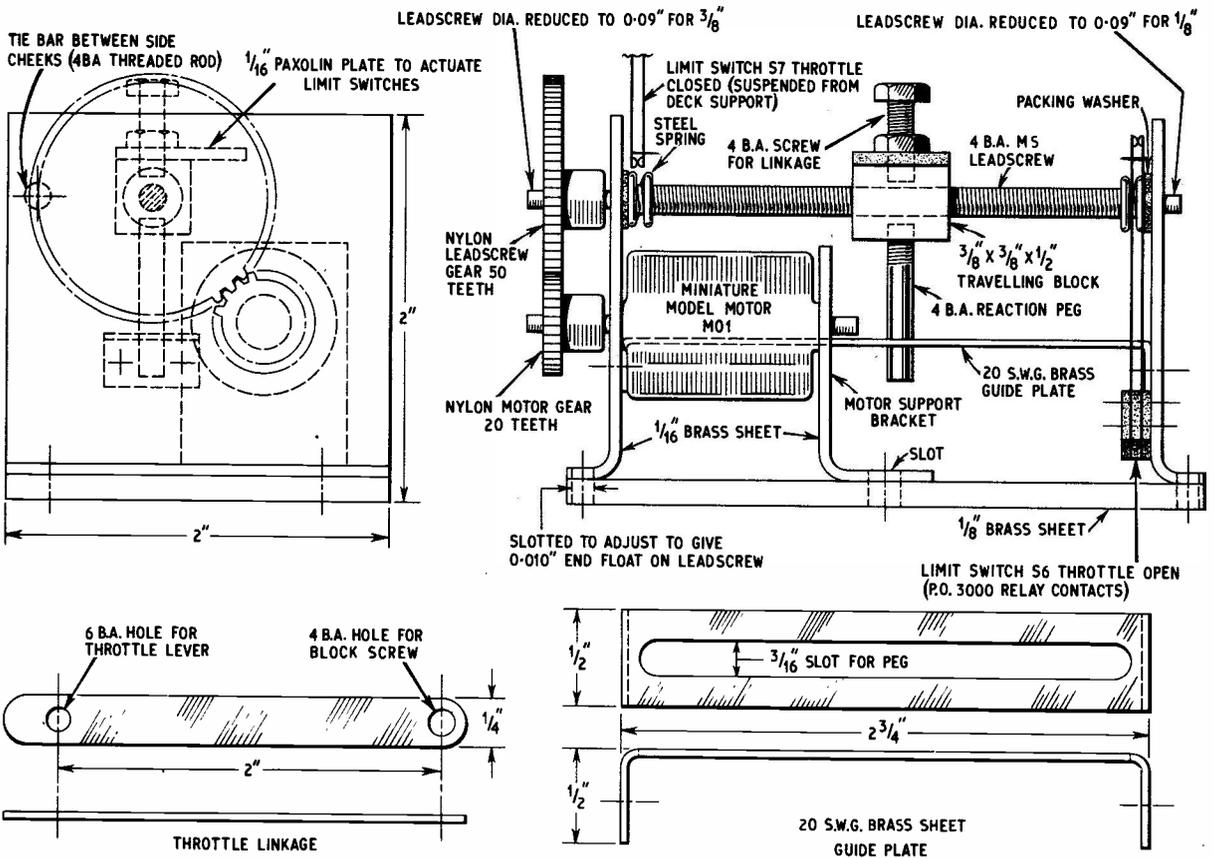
Throttle control mechanism assembly dimensions and details. The limit switches S6 and S7 can be miniature microswitches, see photograph opposite
